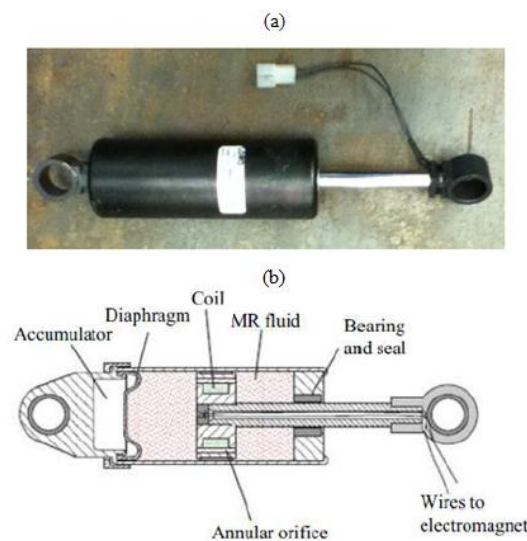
(a) Small-scale MR damper (b) Cross-section [117]
